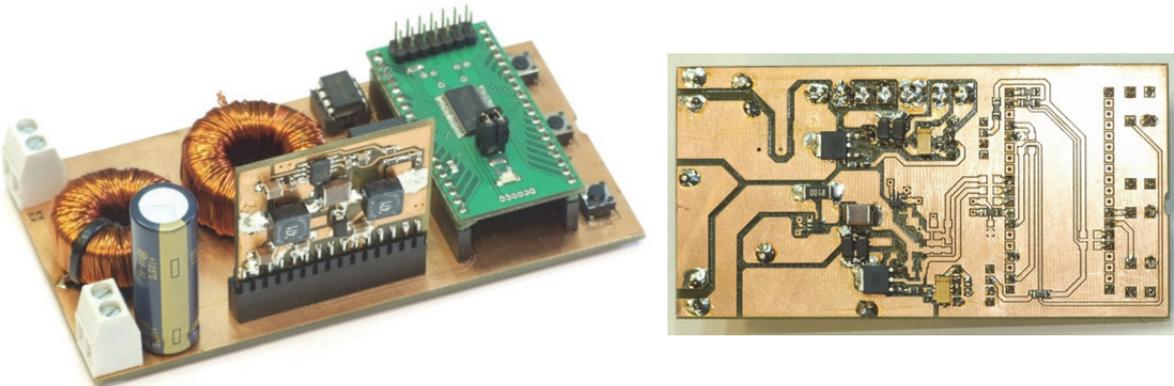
One of the built prototypes: a) top view — the control board with a microcontroller is seen, auxiliary power supply board for control circuit and transistor driver circuits, as well as main inductor L1 and filtering inductor L2; b) bottom view — surface mount transistors VT1, VT2 and diodes VD1 and VD2, as well as CR stage capacitor.
